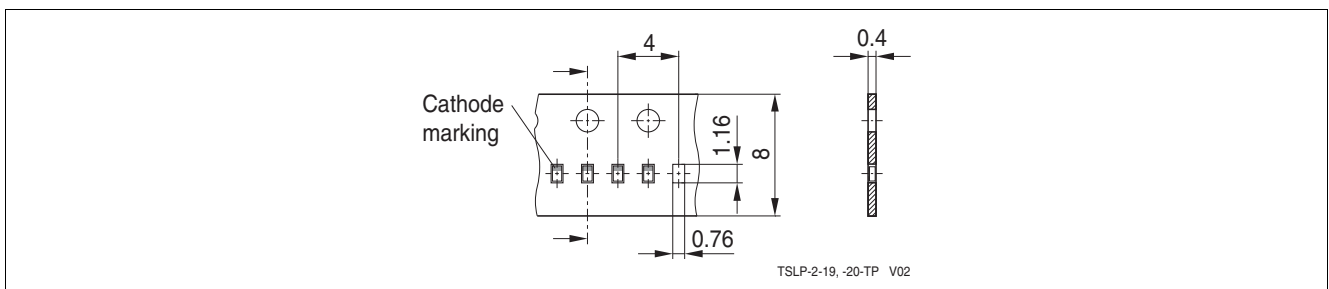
TSLP-2-19: Tape and reel (dimension in mm)
